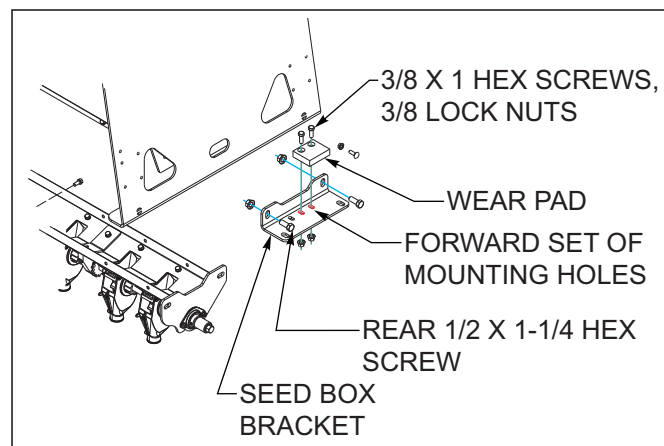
Removal of Rear Screw from Existing Seed Box Bracket
